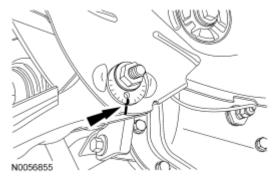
Locating RH Primary Timing Chain Guide Lower Bolt Courtesy of FORD MOTOR CO.
